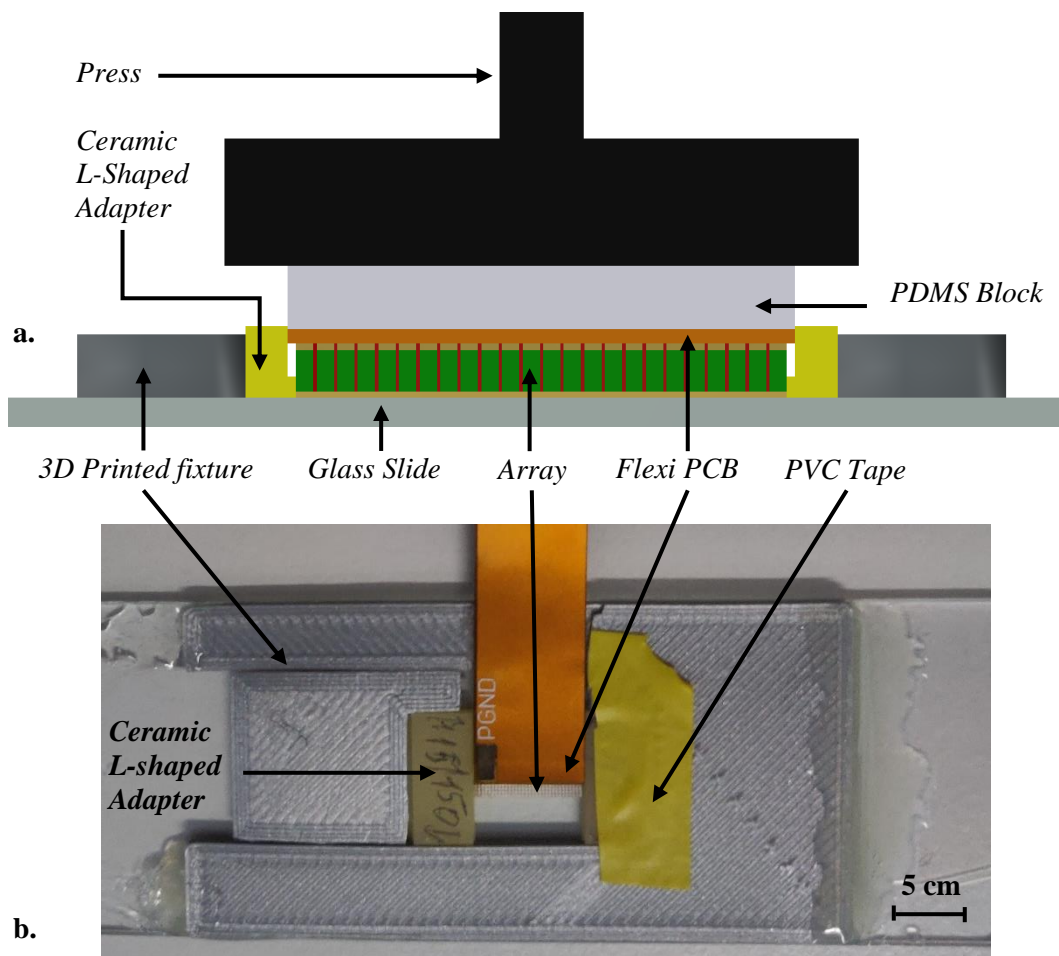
Fixture for Flexible PCB Bonding to the Array: a. Schematic Side View; b. Top View
